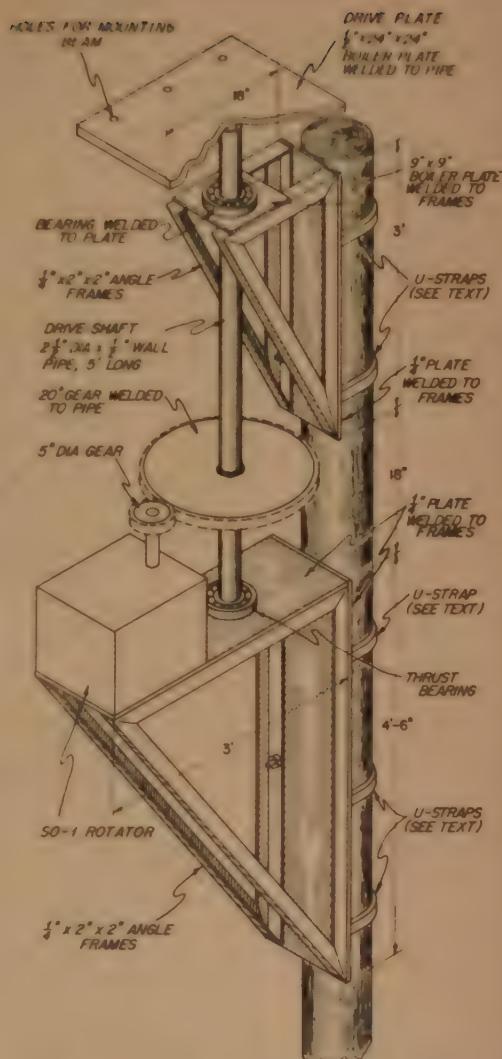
Construction of the platforms to support the rotator, shaft bearings and drive shaft. All principal metal joints are welded.
